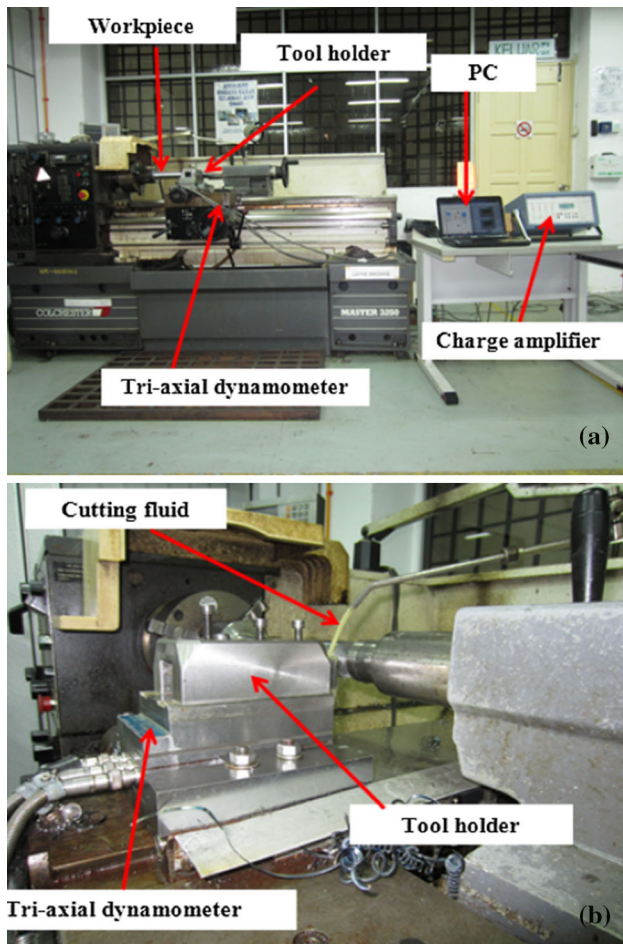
Experimental set up for turning process a set up showing all components, b setup showing cutting fluid delivery
